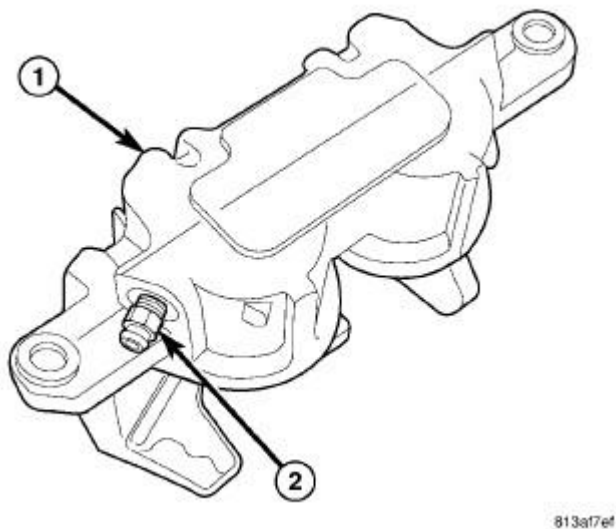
TWIN PISTON CALIPER BLEEDER SCREW
